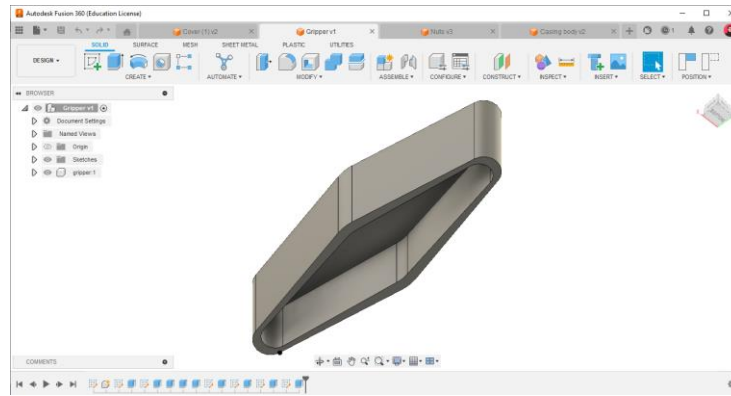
Bottom gripper drawing for deadbolt lock slot
